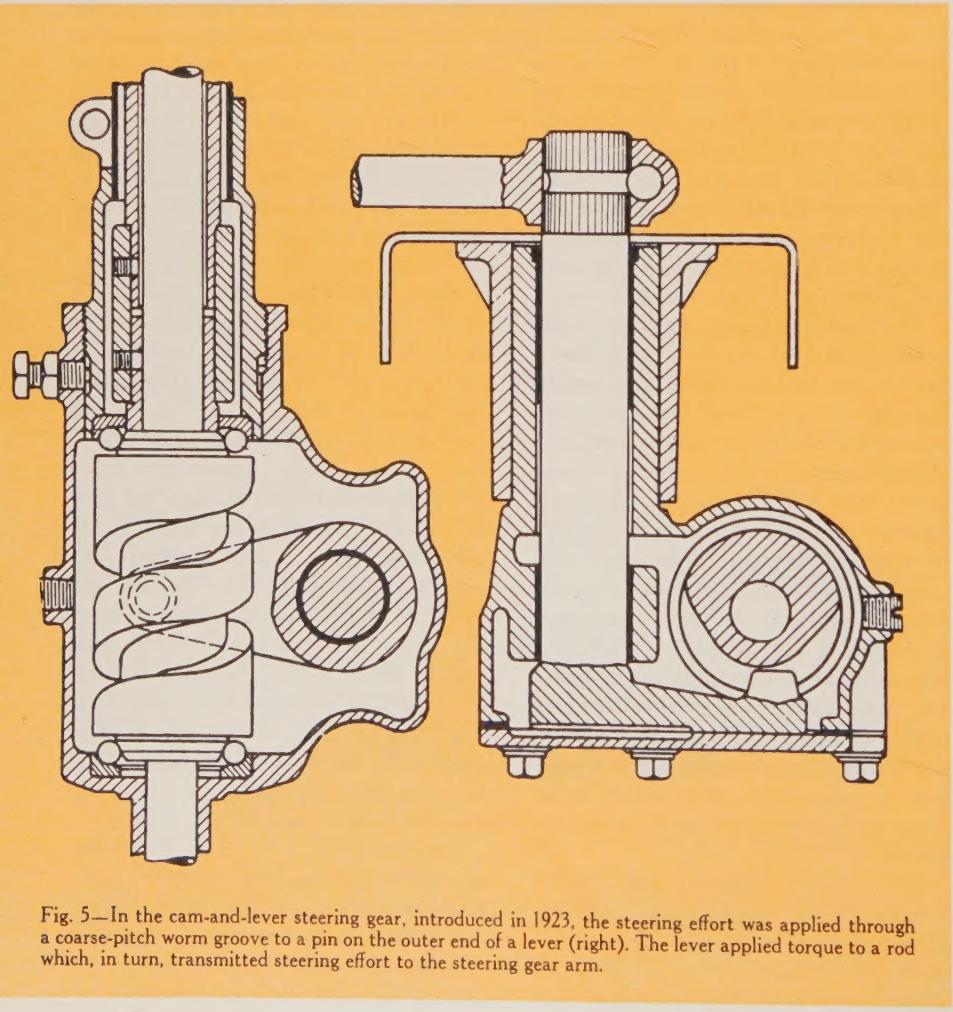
In the cam-and-lever steering gear, introduced in 1923, the steering effort was applied through a coarse-pitch worm groove to a pin on the outer end of a lever (right). The lever applied torque to a rod which, in turn, transmitted steering effort to the steering gear arm.
